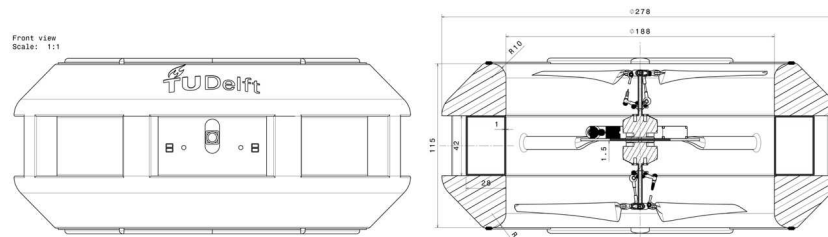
Side view drawings of the scoutDROID, dimensions in mm
